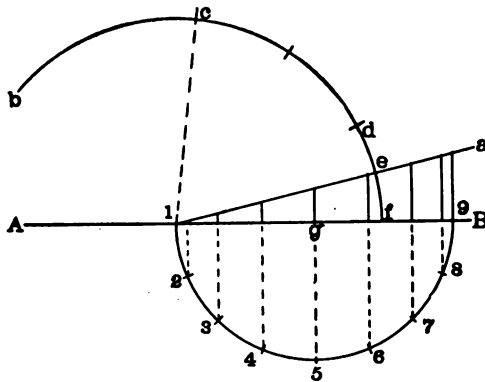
Showing the plan and elevation of a sufficient portion of the elbow to supply all measurements required to complete the pattern.
